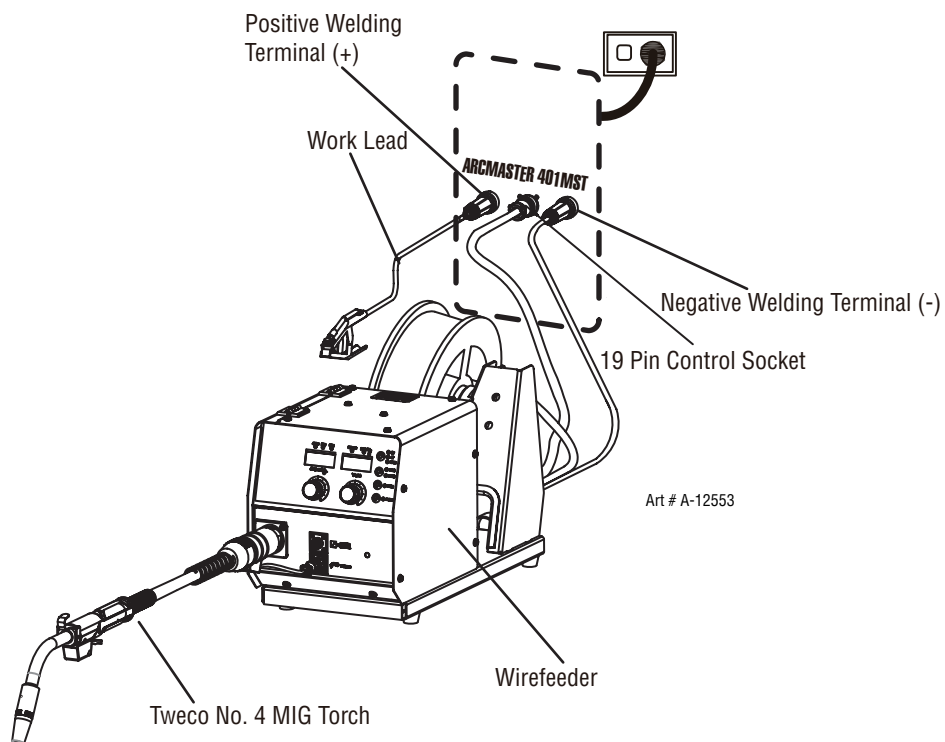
Setup for FCAW Flux Core Arc Welding
